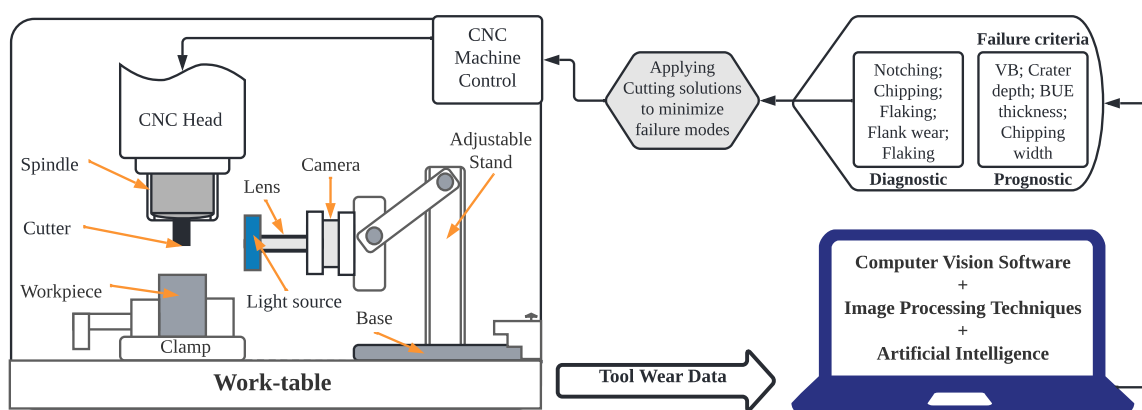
Mounting MV-TCM system's design in a CNC milling machine
